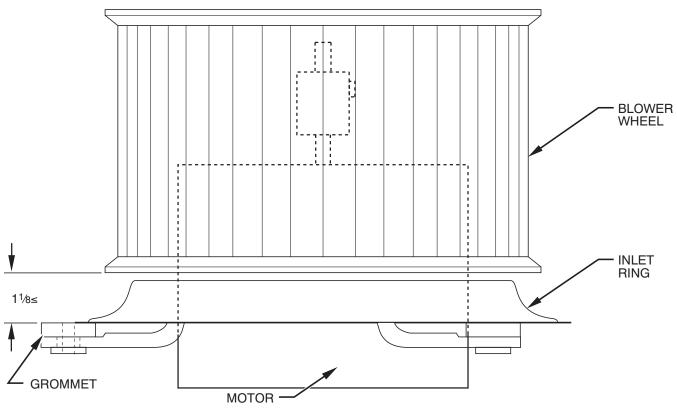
Motor, Inlet Ring, and Blower Wheel Assembly
